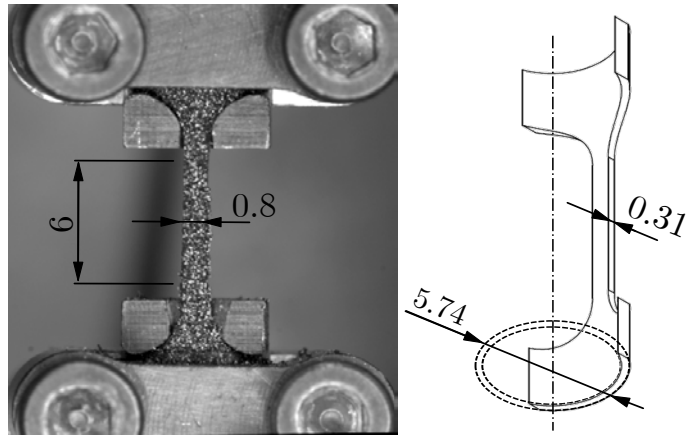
Uniaxial tensile specimen machined from tubes by spark cutting (dimensions in mm).
